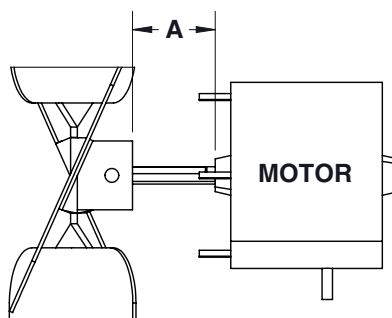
Fan and Motor Spacing (Refer to Table 7)
